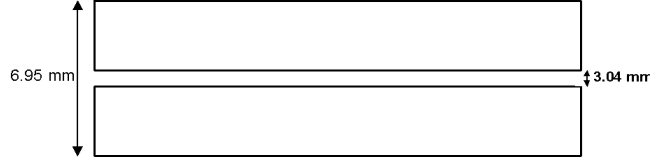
Machining details for a 7 mm coaxial-line specimen. Uncertainties in dimensions approximately ± 0.02 mm.
